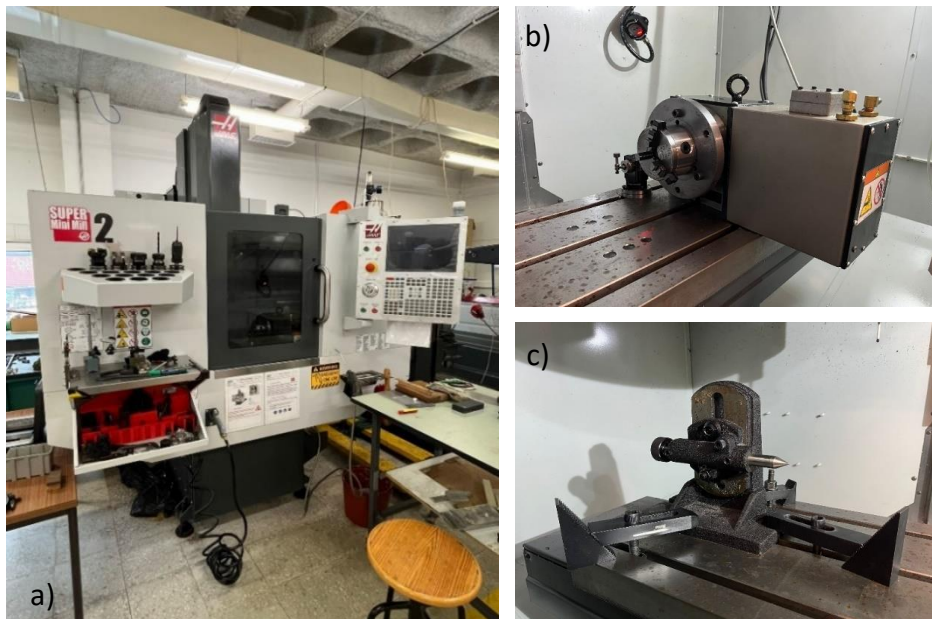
Equipment used to manufacture the conveying screw (a) Haas Super Mini Mill 2 (b) 4<sup>th</sup> axis device (c) Counterpoint
